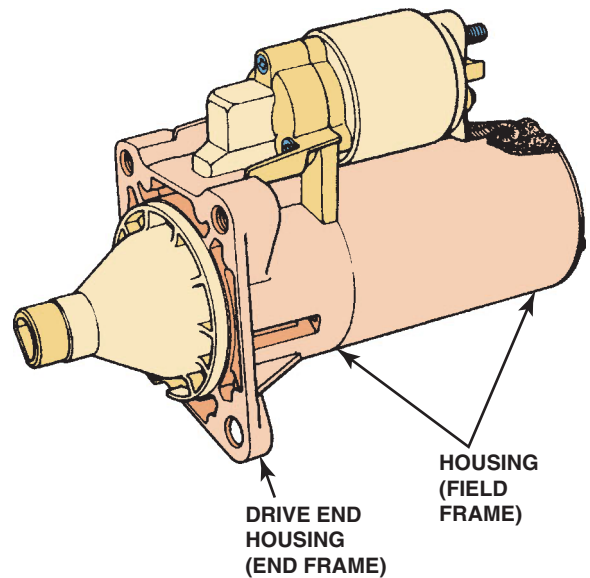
A typical starter motor showing the drive-end housing.
